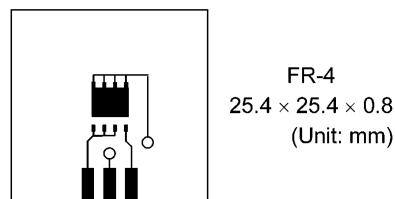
Device Mounted on a Glass-Epoxy Board (b)
